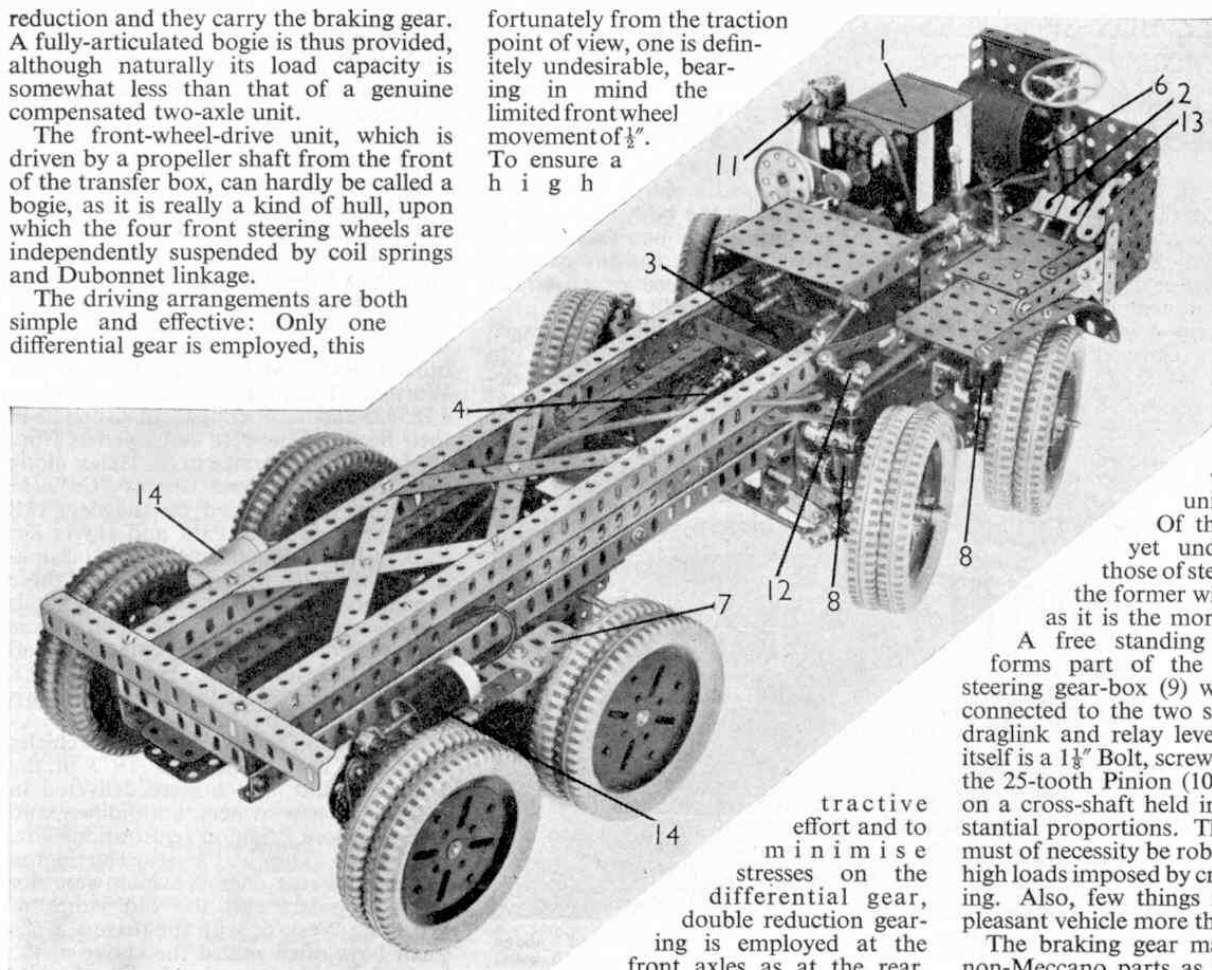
In this view the driving controls, air pressure braking system and steering and driving arrangements of the front wheels can be seen.
